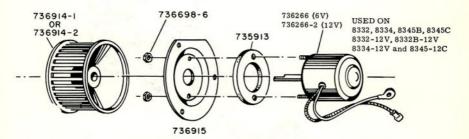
VENTILATING AIR BLOWER & MOUNTING PLATE ASSEMBLY 736065, 736983-1, -2, -3, -4
